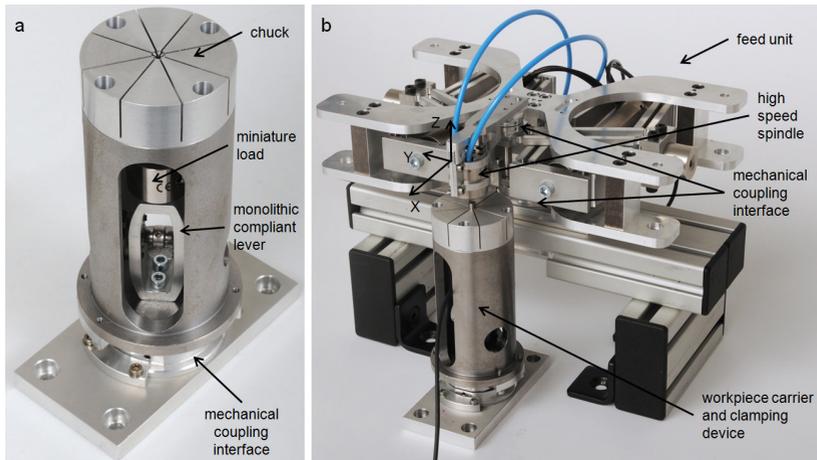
Current workpiece clamping system (a) and a possible setup for micro milling (b)
